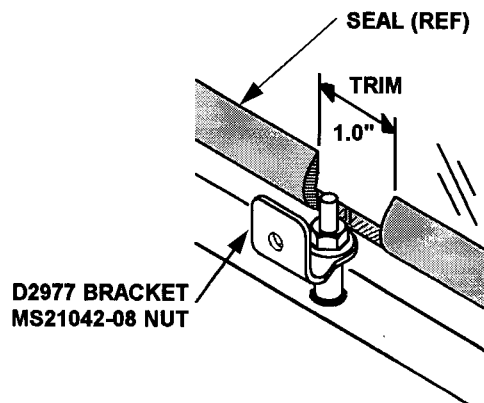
D044-713-015 Passenger Door Window Kit – Tab Installation
